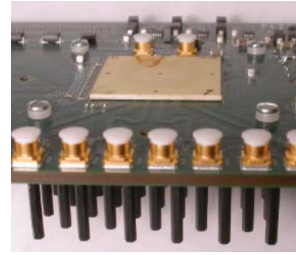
Package mounted on evaluation board with heat sink [142].
